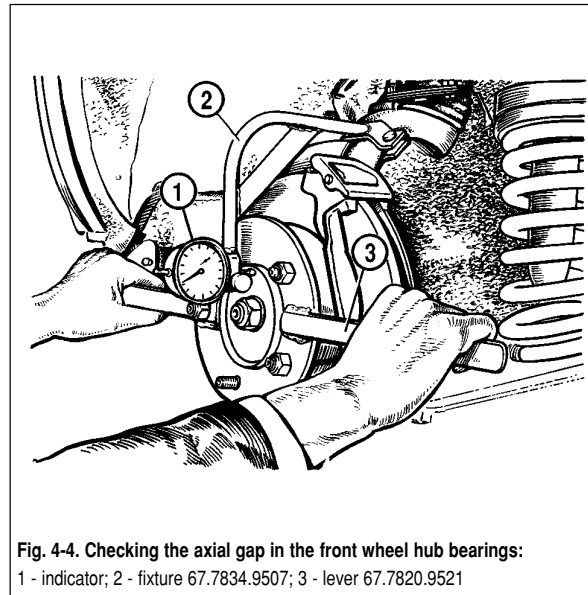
Checking the axial gap in the front wheel hub bearings:
